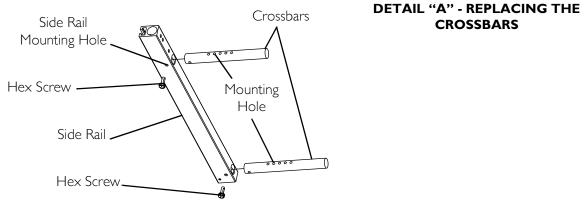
Adjusting the Seat Width - Adjustable ASBA Seats
